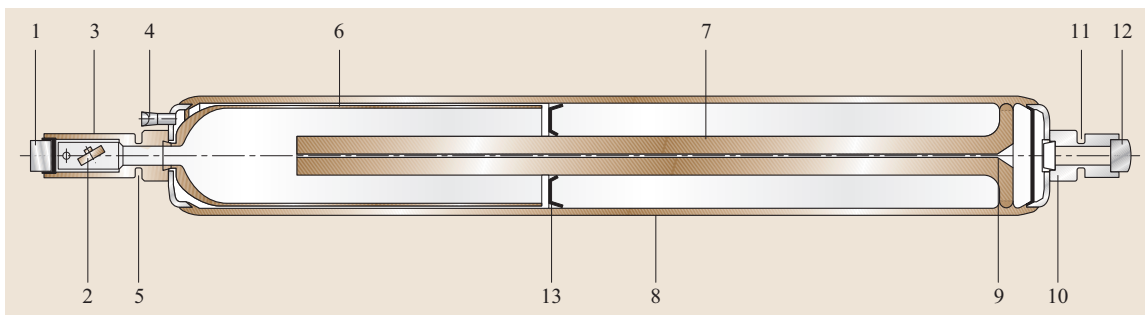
Sectional view of a HeNe laser tube (LASOS Lasertechnik GmbH), see text for explanation
